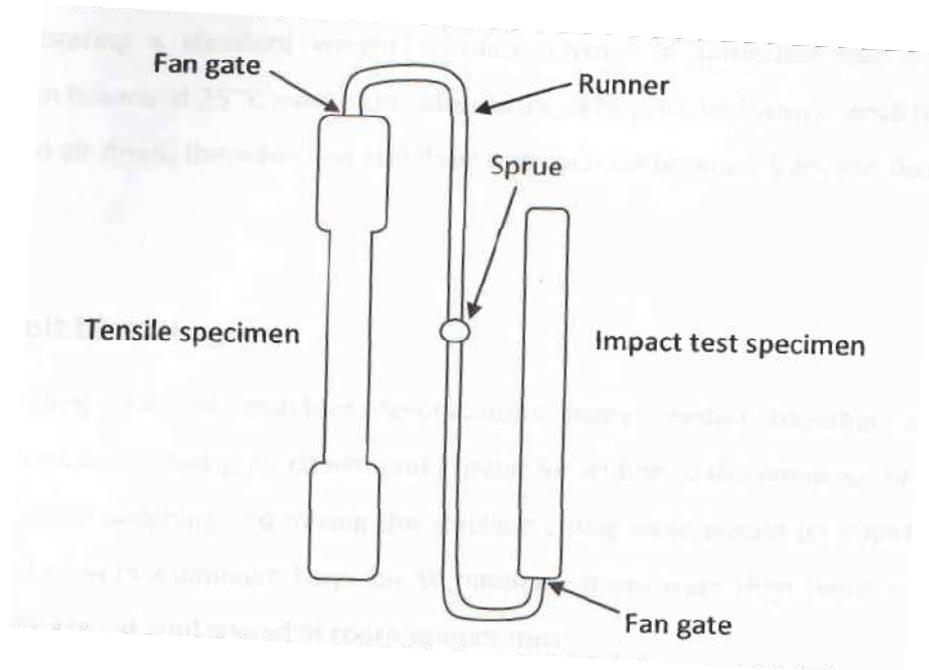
Schematic diagram of injection moulded tensile and impact test specimens, including the runner system.
